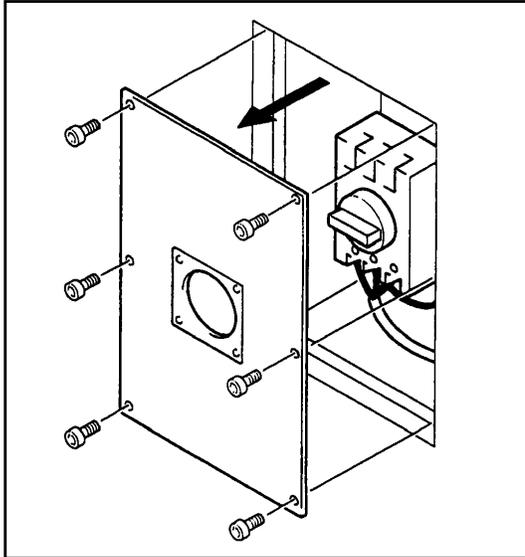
Connecting the Power Supply Cable (1/2)
